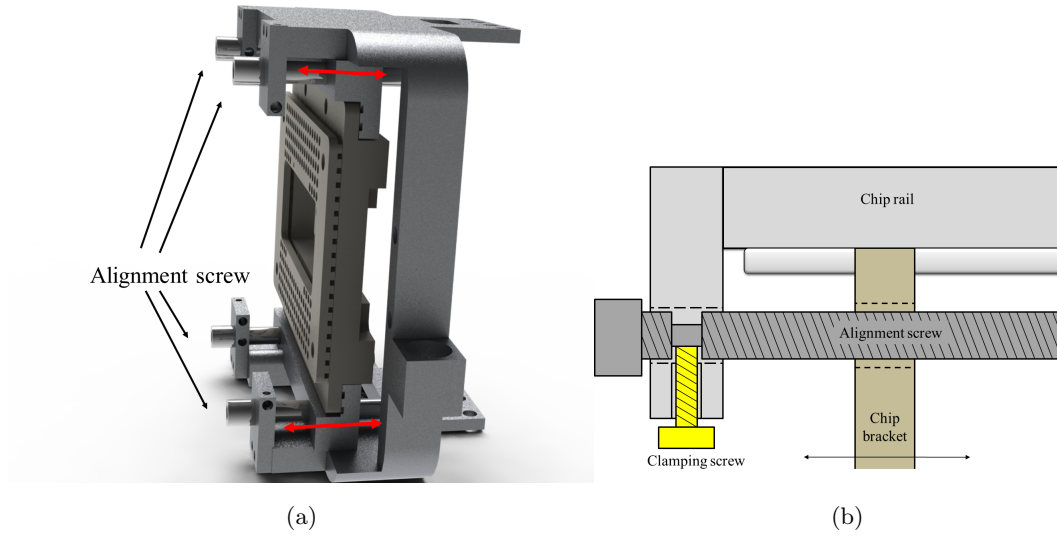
a) Solidworks side view of the assembled chip bracket, by turning the adjustment screws this drives the chip bracket back and forth. b) Drawing of how the adjustment screw works and how it is held in place.
